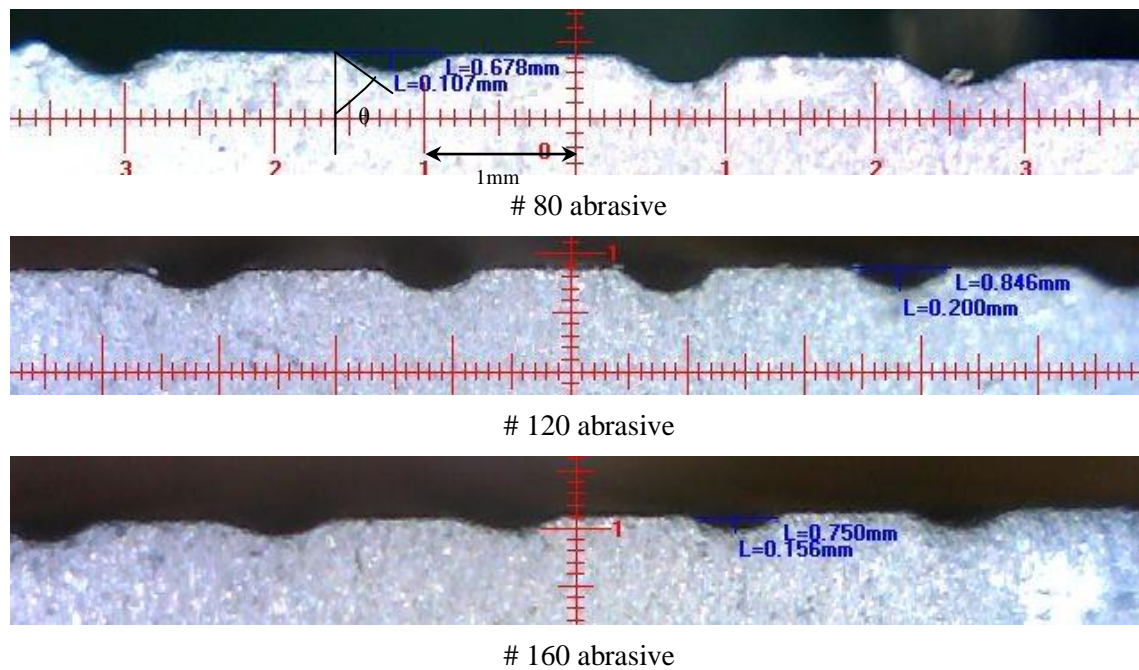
Cut geometry photographs for different abrasive sizes
